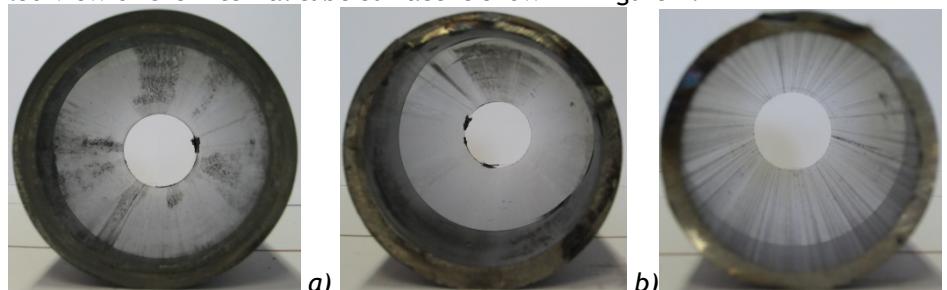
Detail of inner tubes' surface, material E355 a) $\varnothing 57 \times 5$, first draw, b) $\varnothing 50 \times 3,75$, second draw, c) $\varnothing 44 \times 3$, third draw
